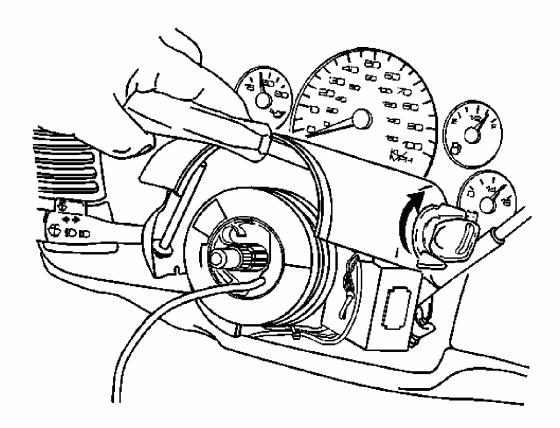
View of Ignition Lock Cylinder Courtesy of GENERAL MOTORS CORP.
